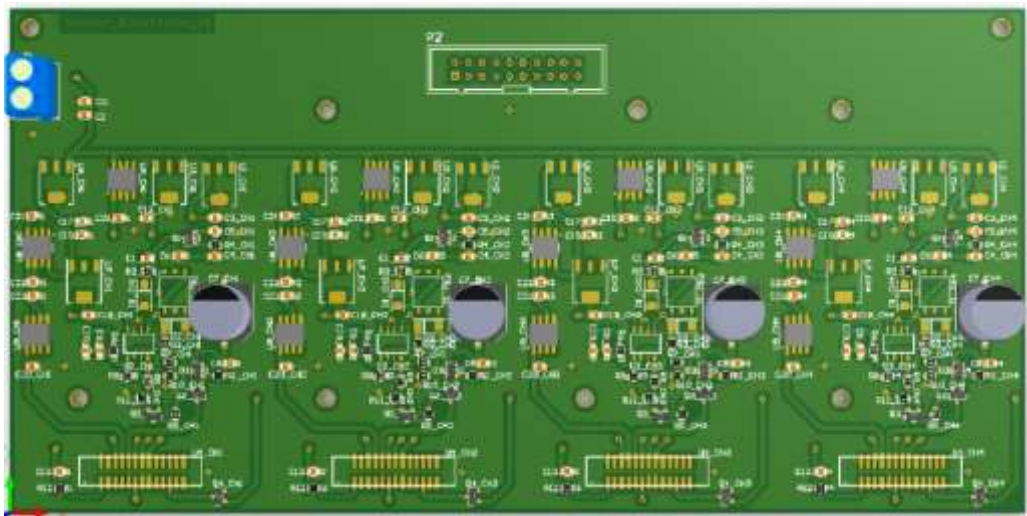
3D of the PCB layout of sensors electronic driving board
